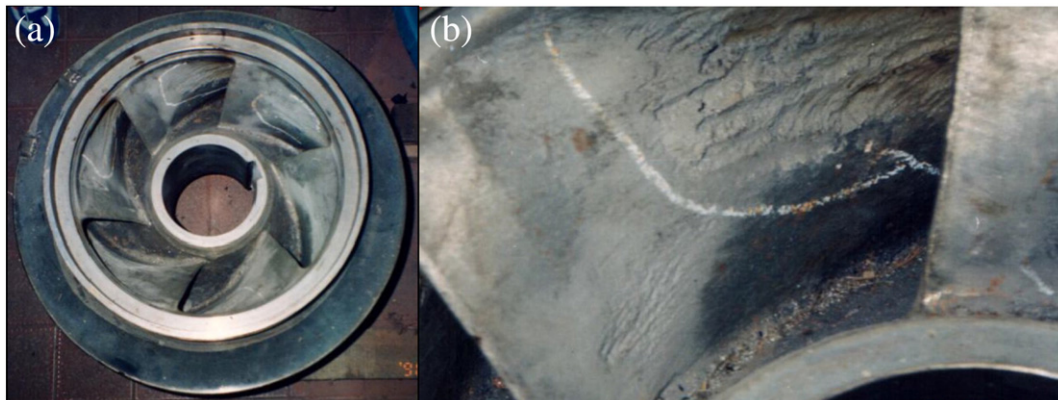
(a) Water pump impeller made of AISI 316 stainless steel (b) cavitation damage in impeller vane.
